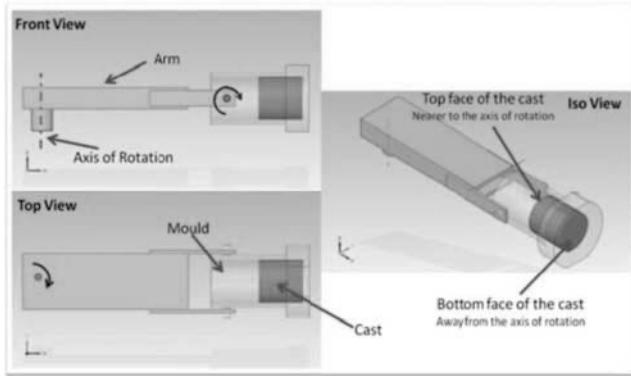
Figure showing arm, mold and casting of the centrifuge machine
